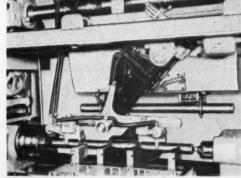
Injector Arm movement completed. Rough shaft on centres, chuck jaws closed and tailstock spindle advanced. Injector Arm Fingers will next release shaft, and machining begins while Trolley discharges finished piece and return, with the next rough shaft.
